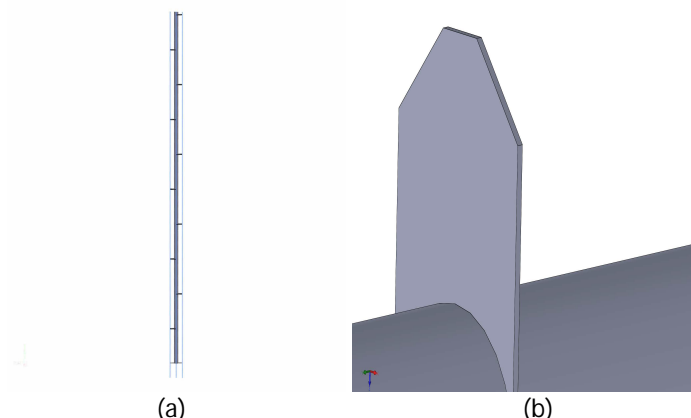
Top View and Isometric View of Inner Circular Tube having Pentagonal Shape Inserts
